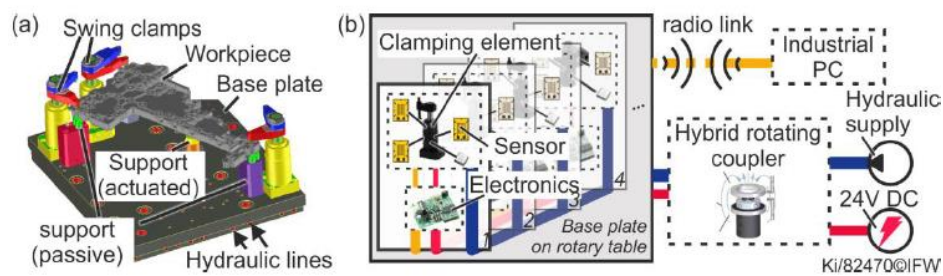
(a) Hydraulic clamping fixture (b) Concept for the sensory clamping system
